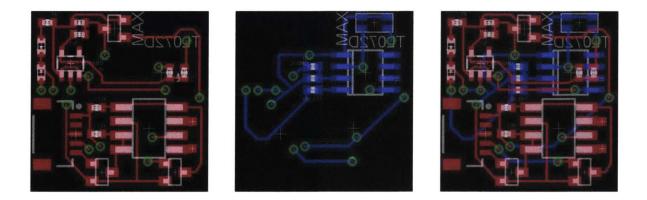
Printed circuit board showing double sided layout, top layer (red) and bottom layer (blue) shown individually and then shown combined.
